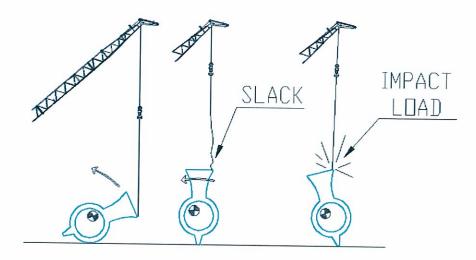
Impact Loads Due to Rolling of Compact Casting in Sandpit
